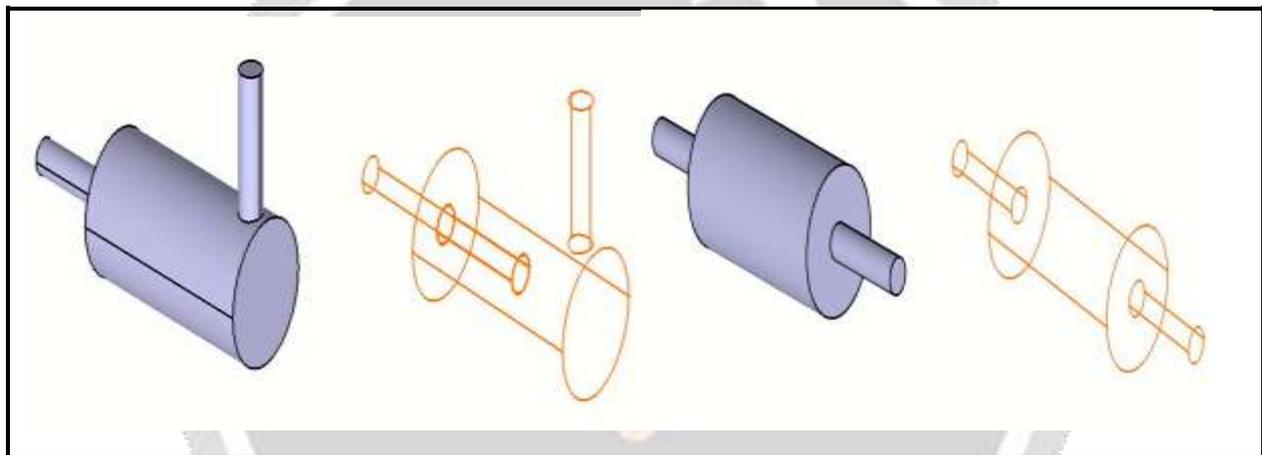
Extended inlet expansion chamber & Simple expansion chamber
